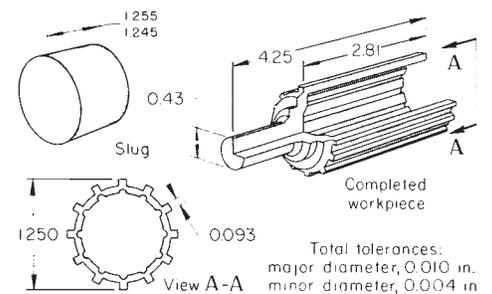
Copper alloy C14500 rotor produced by combined backward and forward extrusion. Dimensions given in inches
